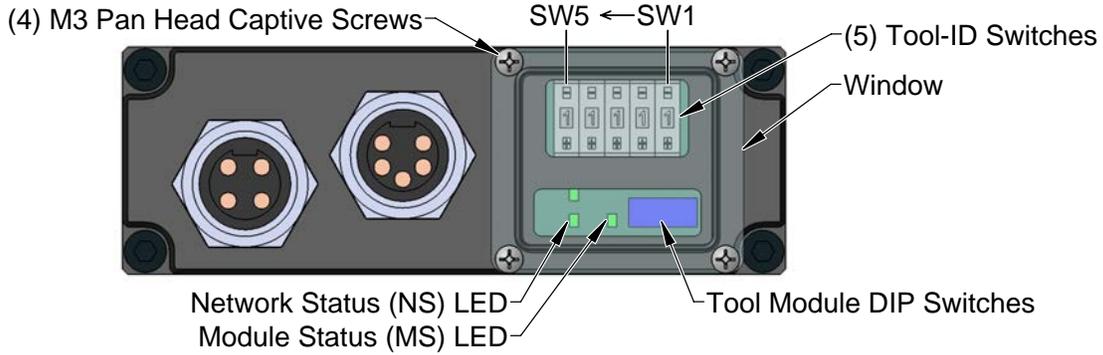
Master Side, Tool Stand Interlock (TSI)
